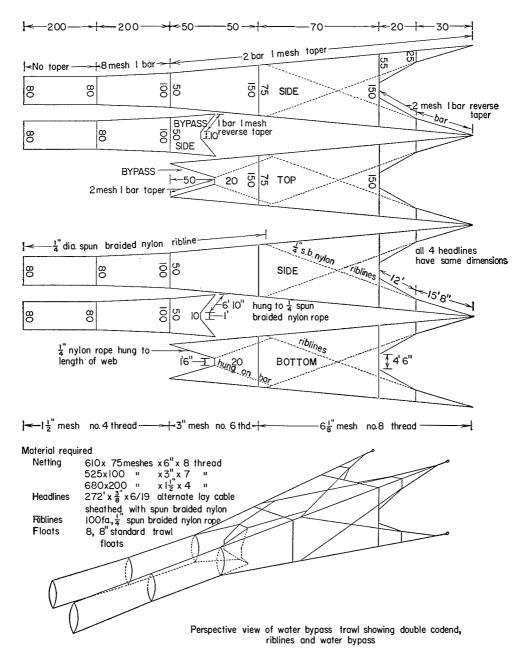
The plan and details of construction of the water-bypass "trouser" trawl.
